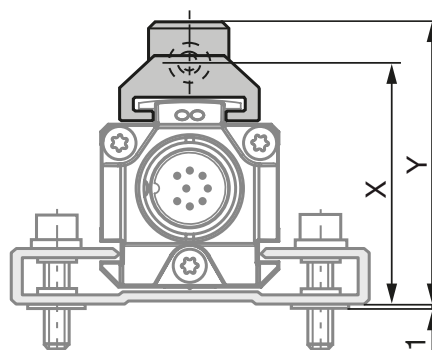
Dimensions and distances with BTL5-M/N-2814-1S magnet
